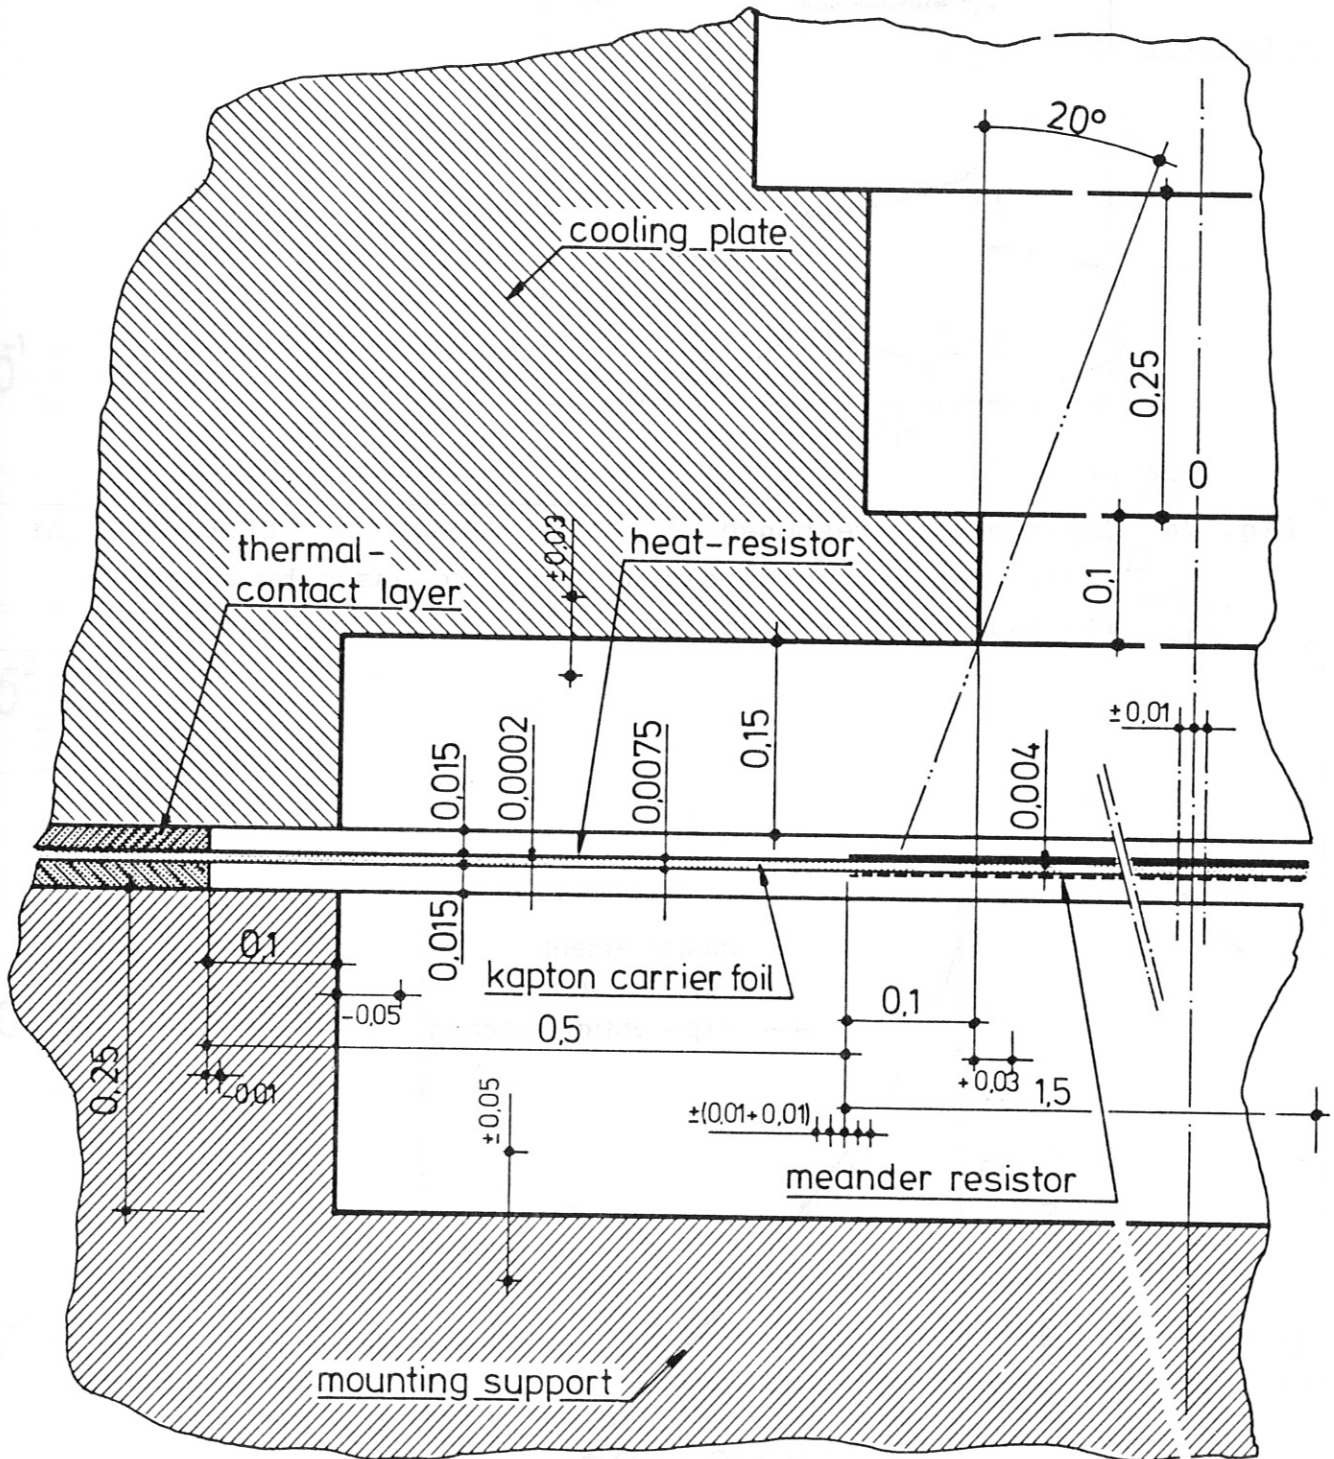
Blown-up section of Fig. 9, giving a side view of the bolometer foil, the cooling body and the step-like window slit
